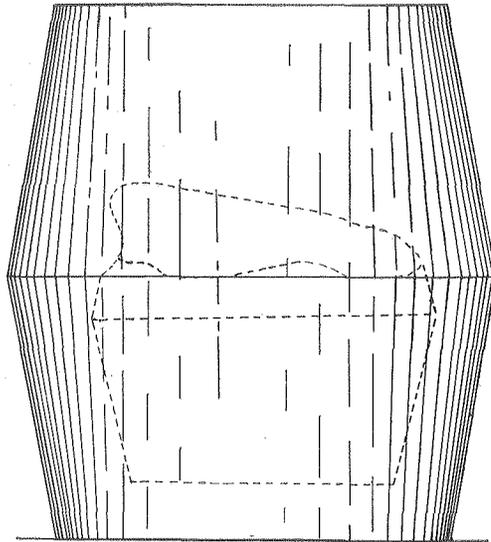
Sectional View of Rings and Imbedded Die Ready for Receiving Counterdie Metal
